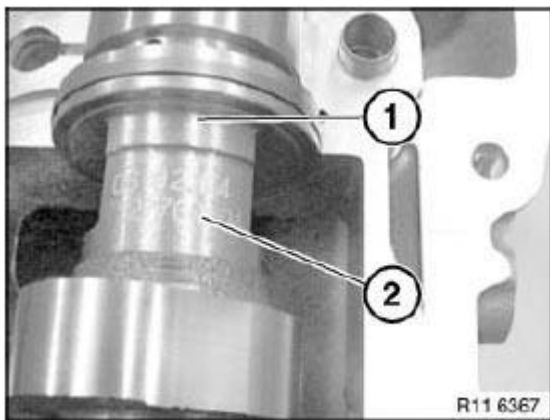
Part Numbers On Inlet And Exhaust Camshafts
